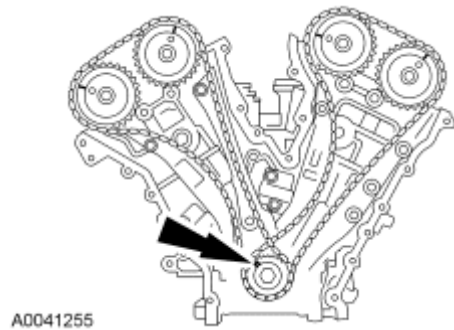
Identifying Crankshaft Keyway In 11 O'Clock Position
